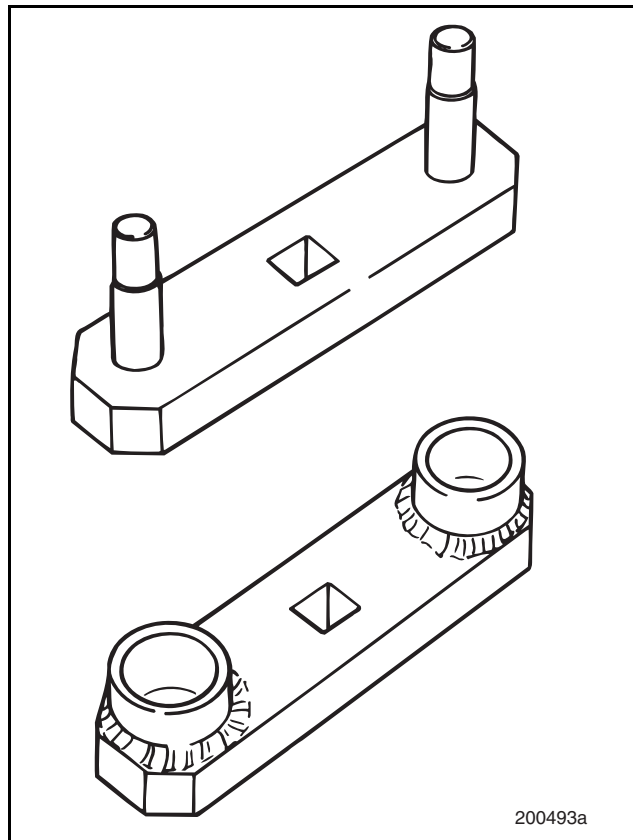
V-MAC Hub Rotation Tool J 38740
